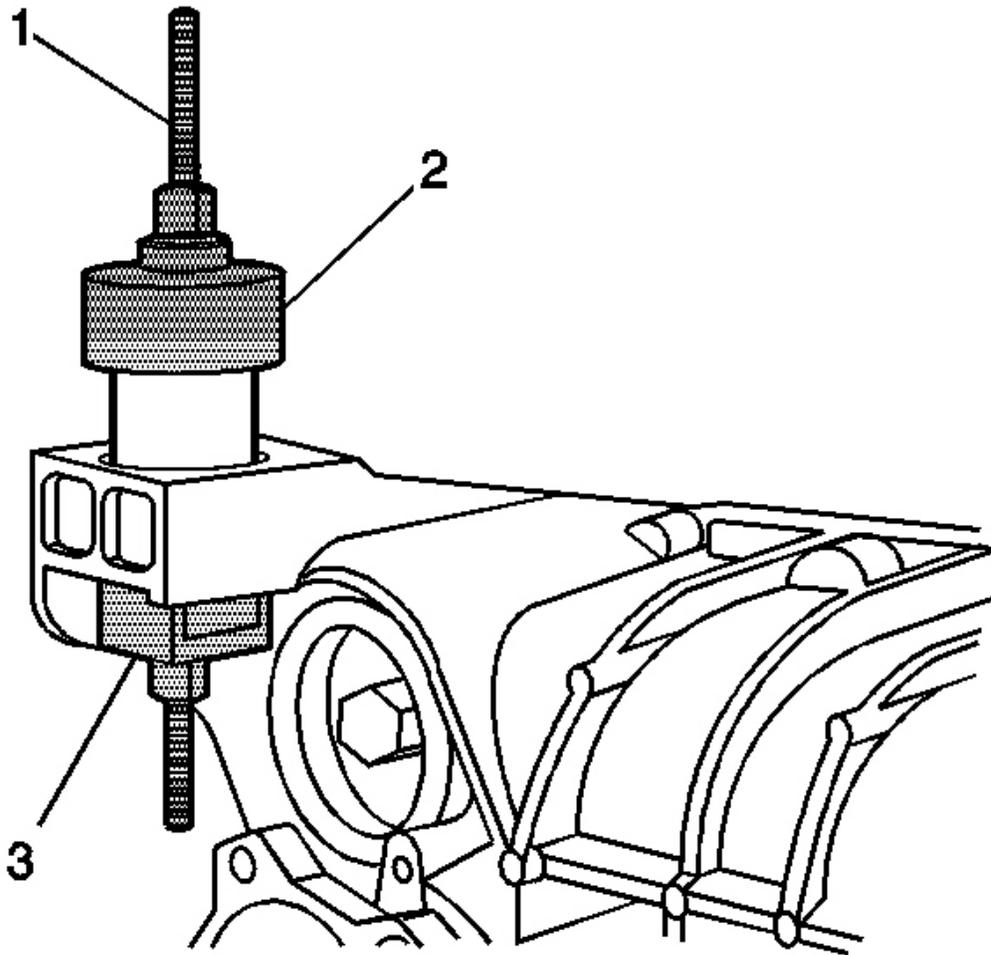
Installing J 45755-2, J 45755-1, Forcing Screw, Bearing & Washers Over Differential Carrier Assembly Bushing
